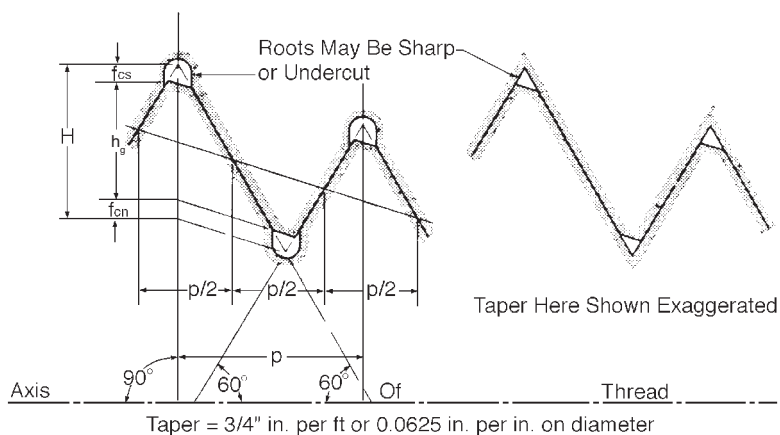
Gauge Thread Form for Line Pipe and Round Thread Casing and Tubing
